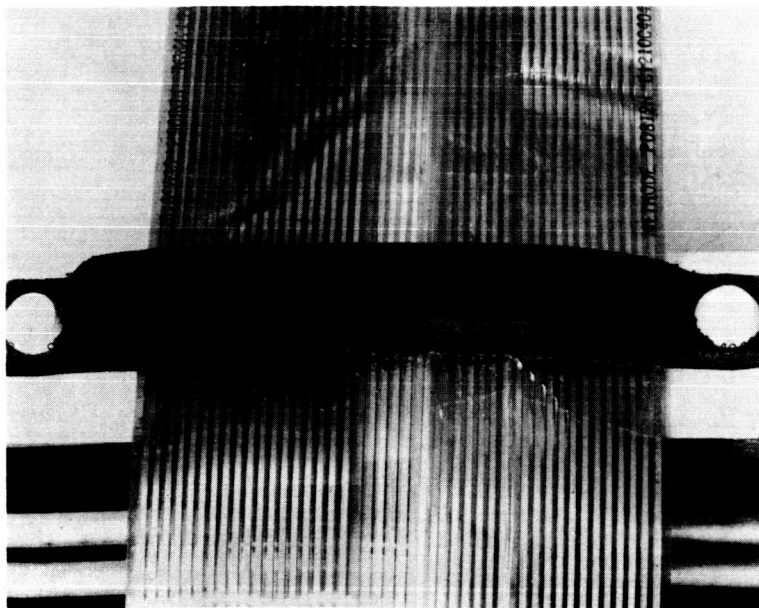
FLAT CABLE INSTALLATION CLAMP (VELCRO-NYLON TAPE)
